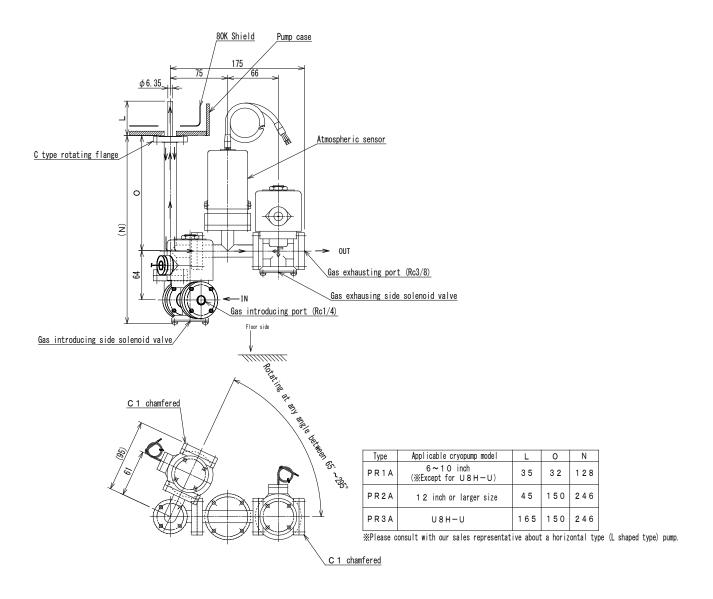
Regeneration Gas Purge PR Unit Dimensions
